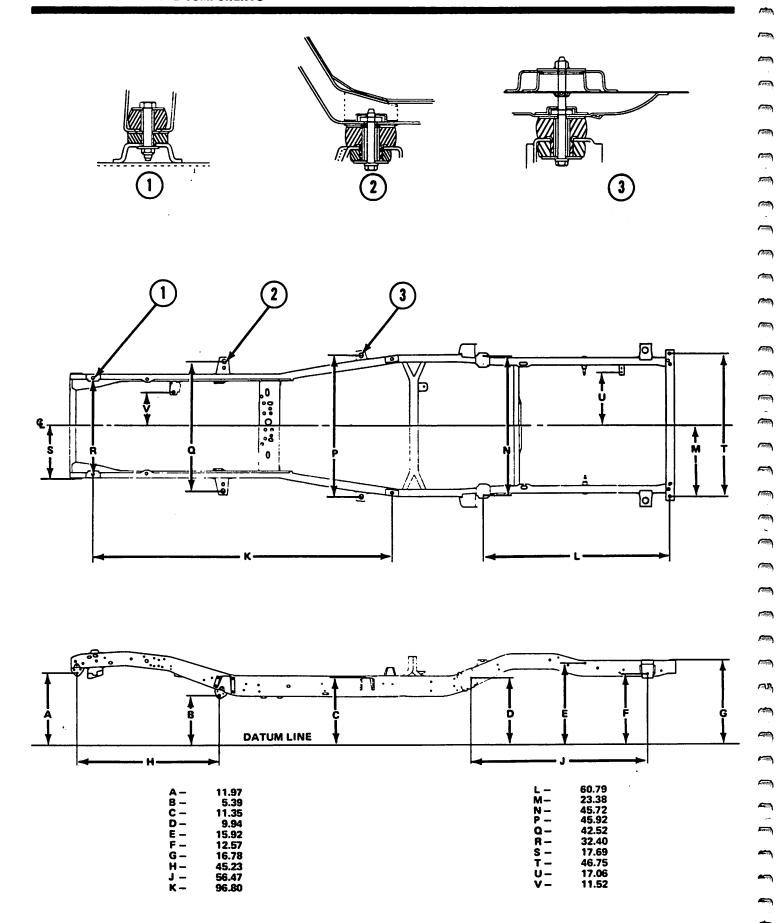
F-5 Truck Frame Dimensions—131-inch Wheelbase (Inches)
